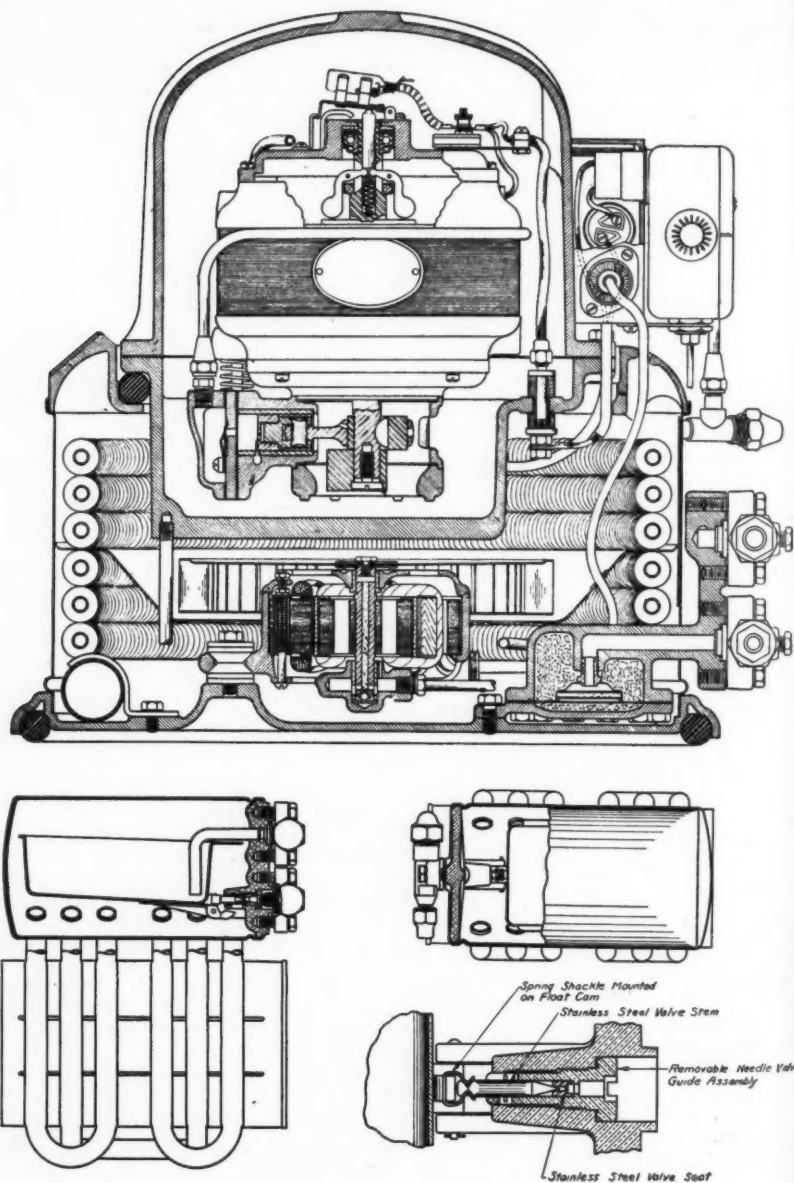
Detailed section of Model X Compressor unit with Type KO cooling unit showing needle valve assembly
